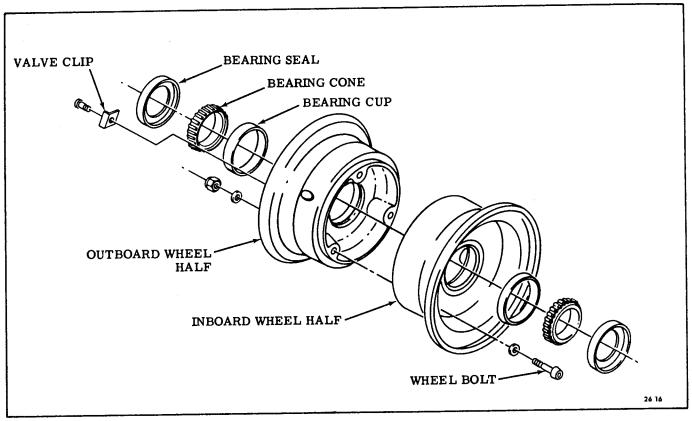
Nose Wheel Assembly (Aircraft 121 and Subs)
